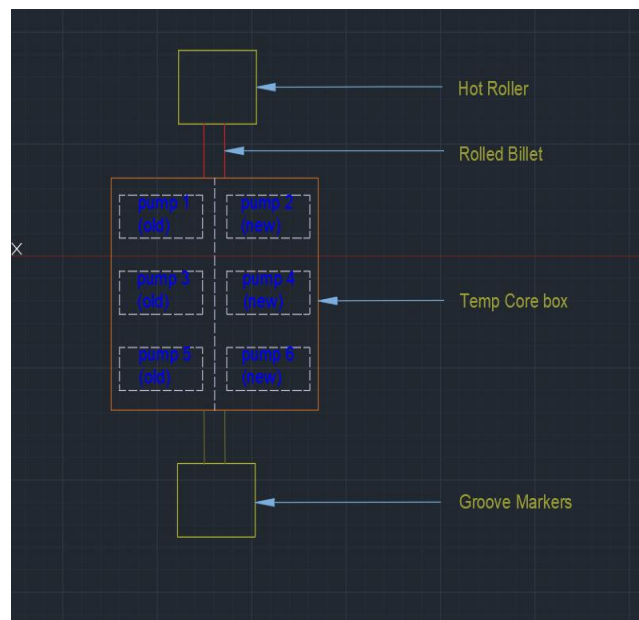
Top View of Tempcore Box Arrangement in LMMM Department
